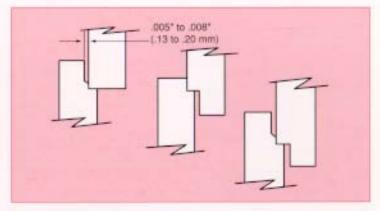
SHEAR JOINTS WITH FLASH WELLS
